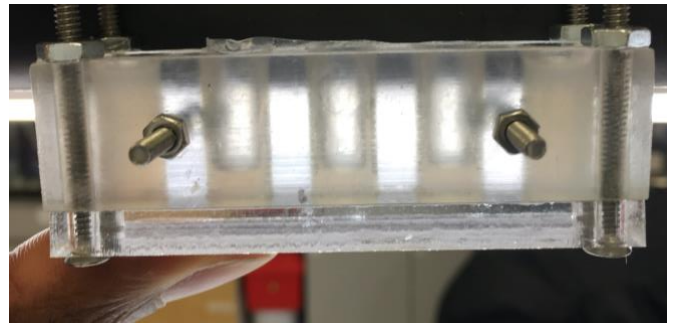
Pouring some ecoflex 30 into the assembled mold to seal the bottom end of the mold
